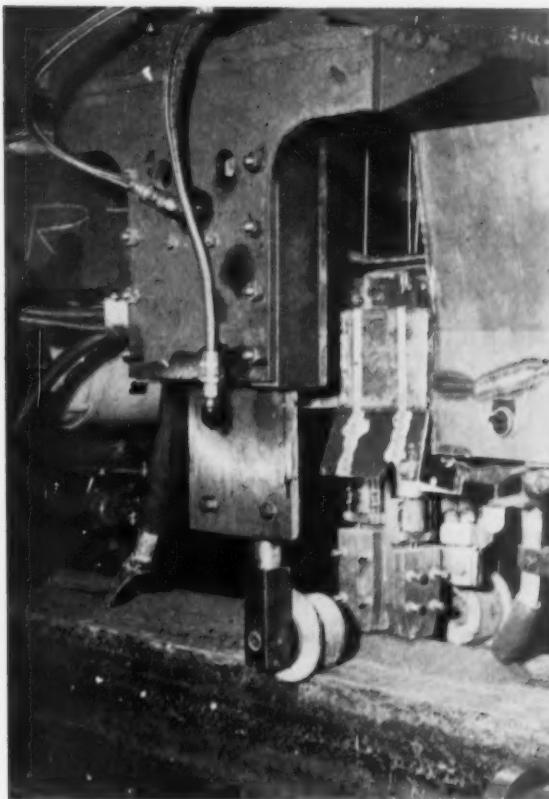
Flux is laid down on top of the bars ahead of the weld and picked up behind.
